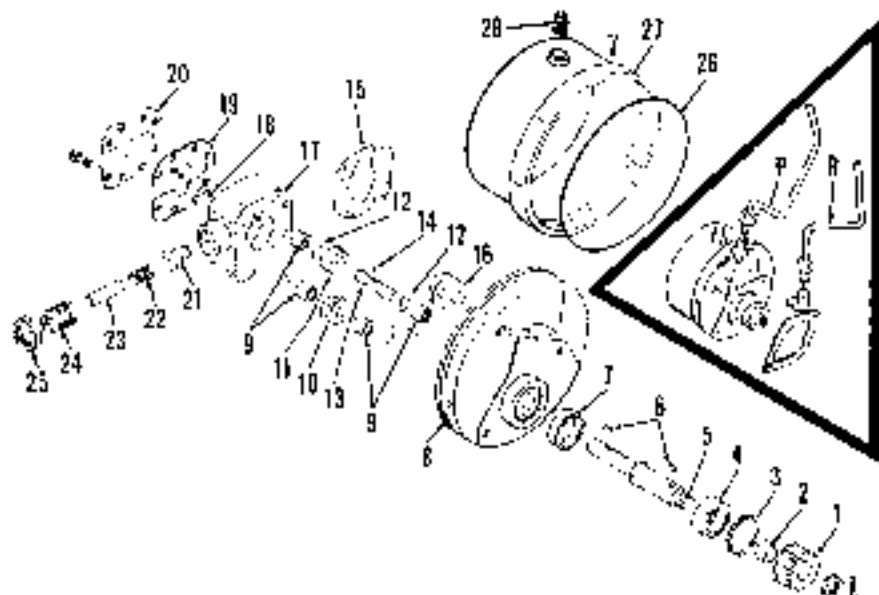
Exploded view of power steering pump used on Models MF230, MF235 and MF245 equipped with diesel engine. Pump used on Models MF240 and MF250 is similar except dual springs are used on relief valve and spring guide pin (23) is not used. Inset shows location of pressure line (P) and return line (R).
